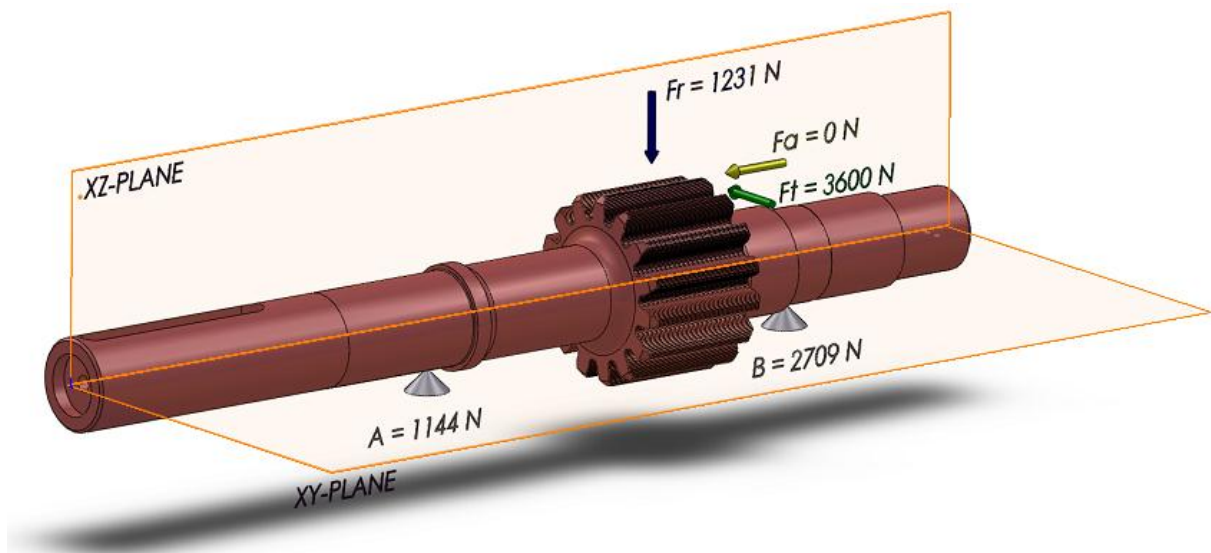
CAD model of the gearbox shaft illustrating the calculated sizes and directions of acting forces.
